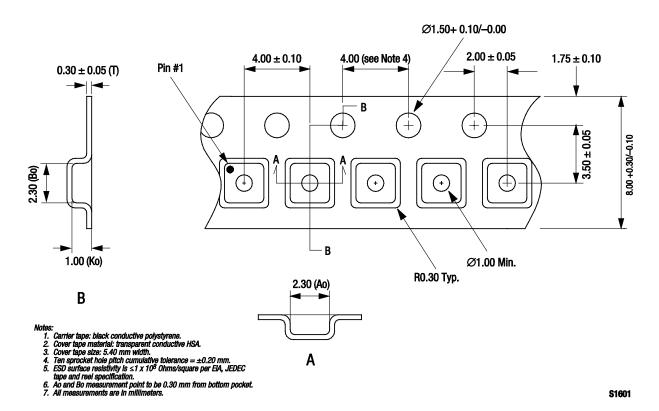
SKY67013-396LF Tape and Reel Dimensions
